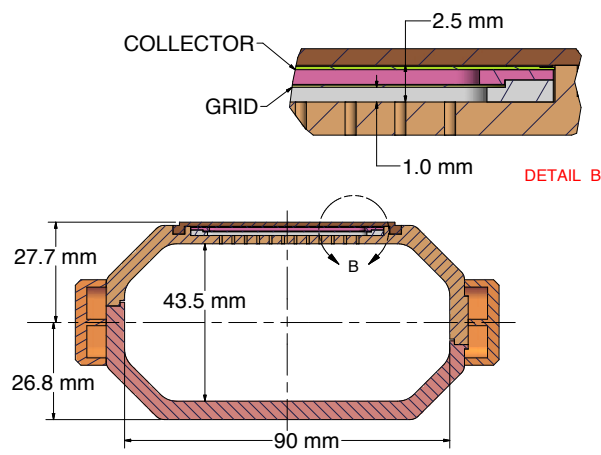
Cross section view of a RFA structure on the SCW beam pipe
